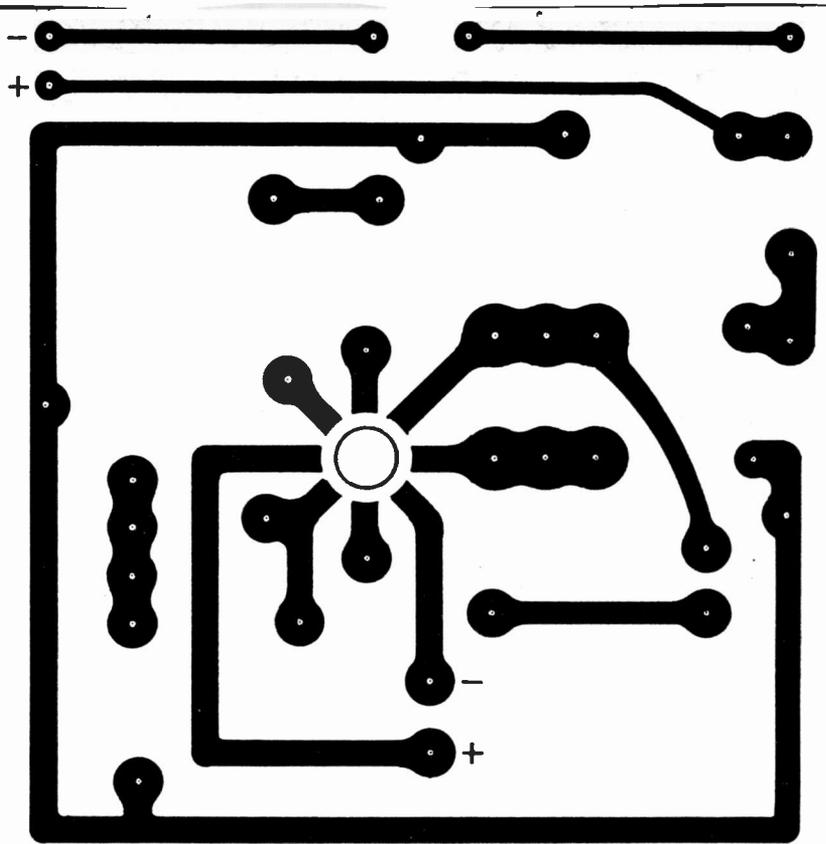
Actual-size printed board foil layout. You can create this circuit on perf board if desired.
